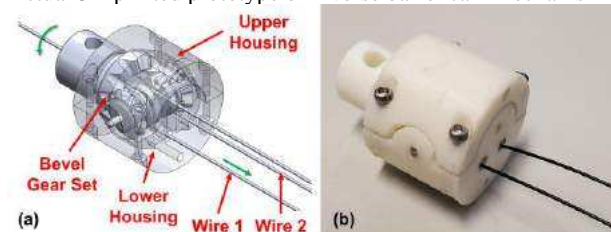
(a) 3D model of bevel gear mechanism (b) Actual 3D printed prototype of bevel gear mechanism
